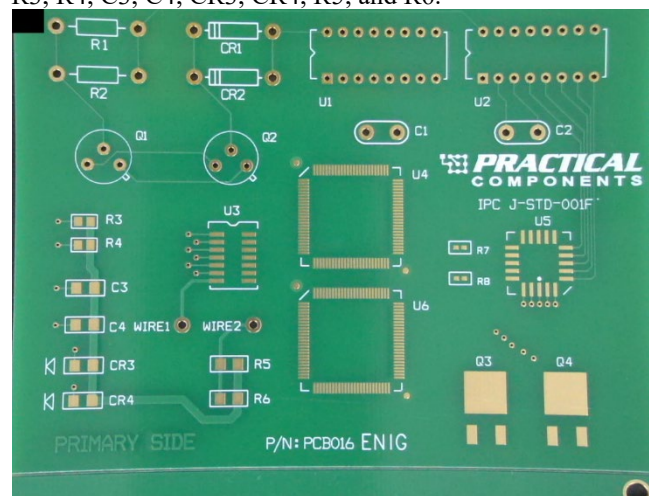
IPC016-IPC J-STD-001-REV F/G-LF Solder Training Kit
